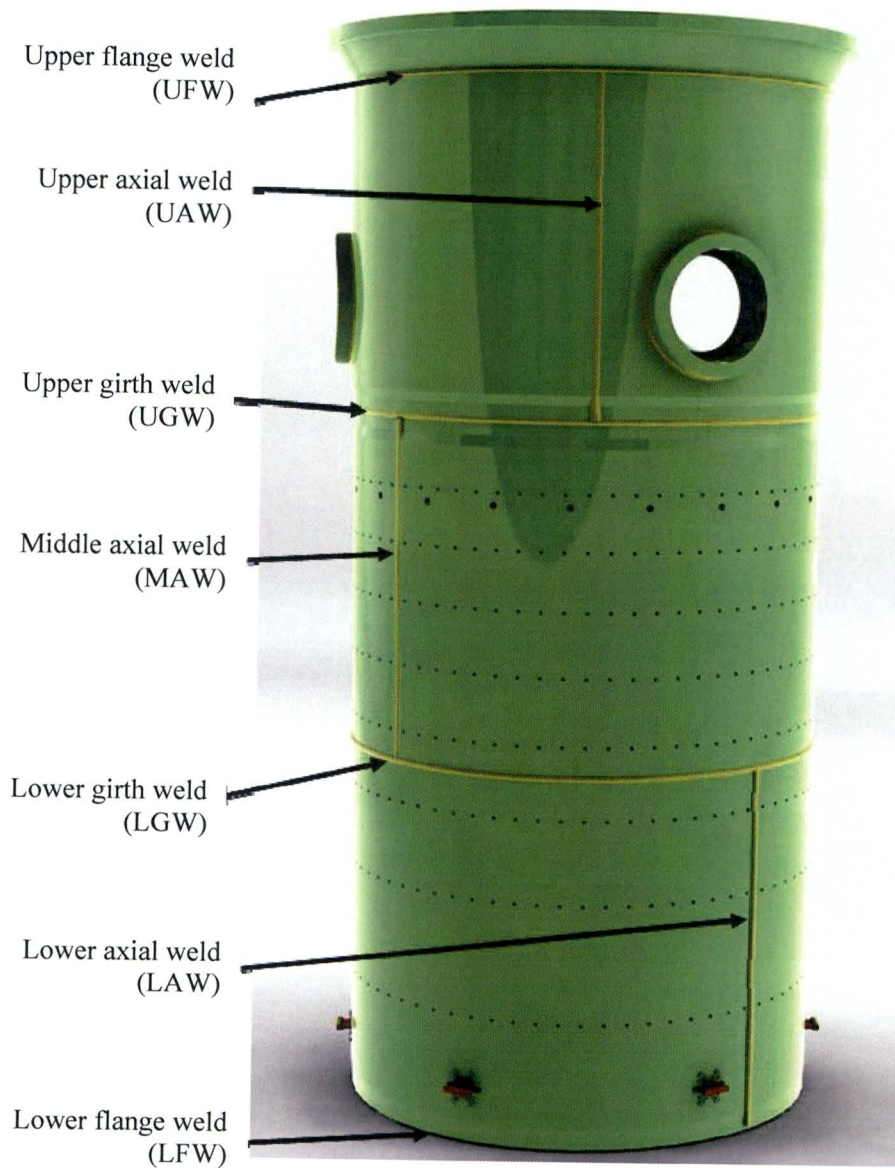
Example of Westinghouse Core Barrel Weld Identification
